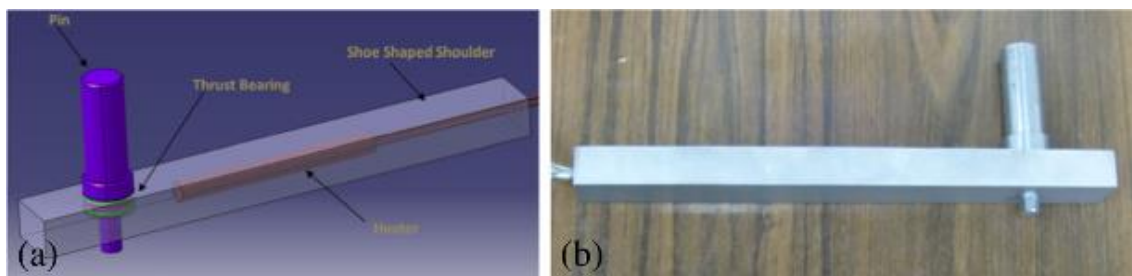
Schematic (a) and photograph (b) pictures of hot shoe tooling system[24].
